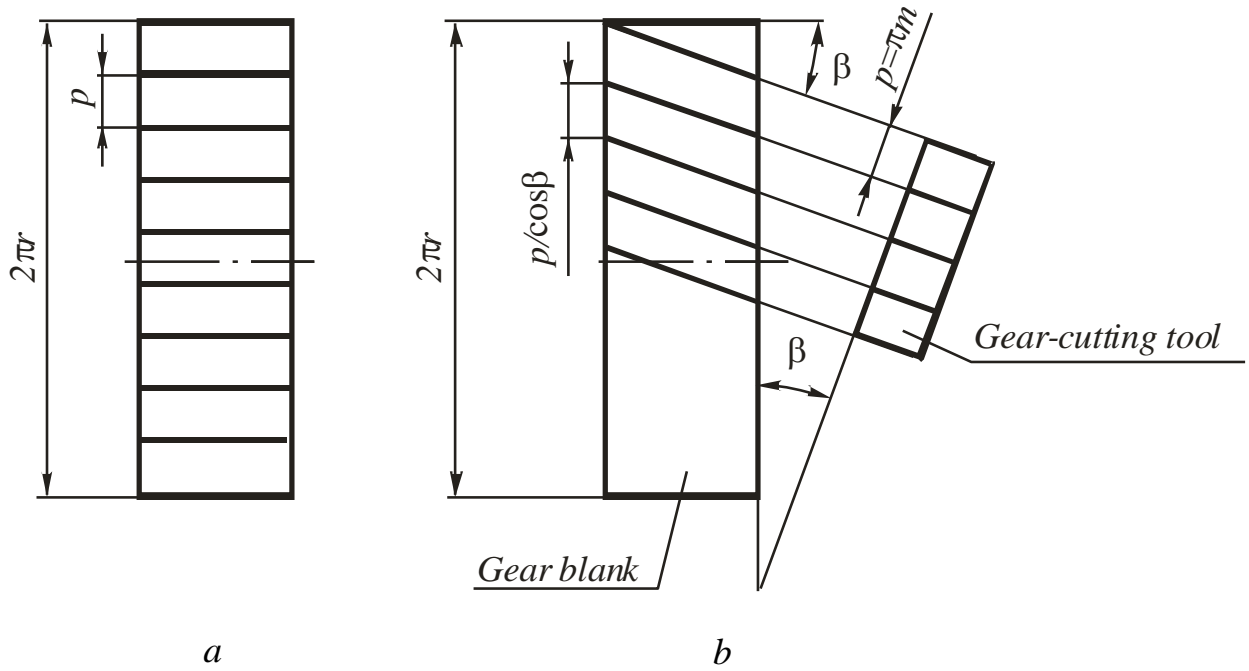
Spur (*a*) and helical (*b*) gears
